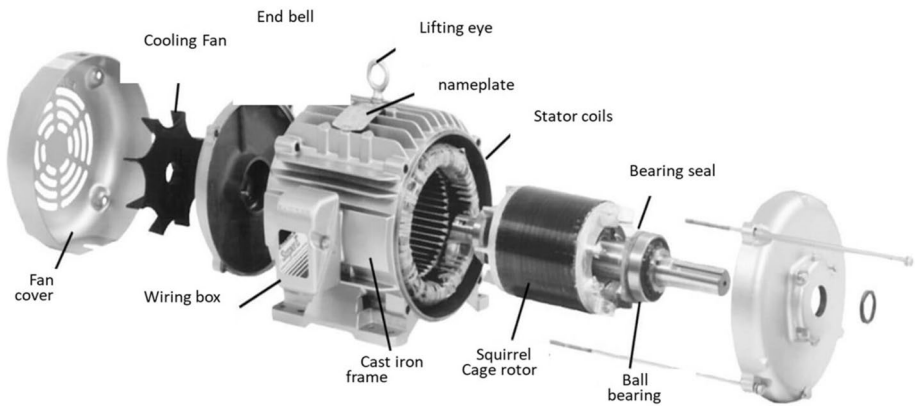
Exploded view diagram of a three-phase induction motor (<https://electricala2z.com/>)
